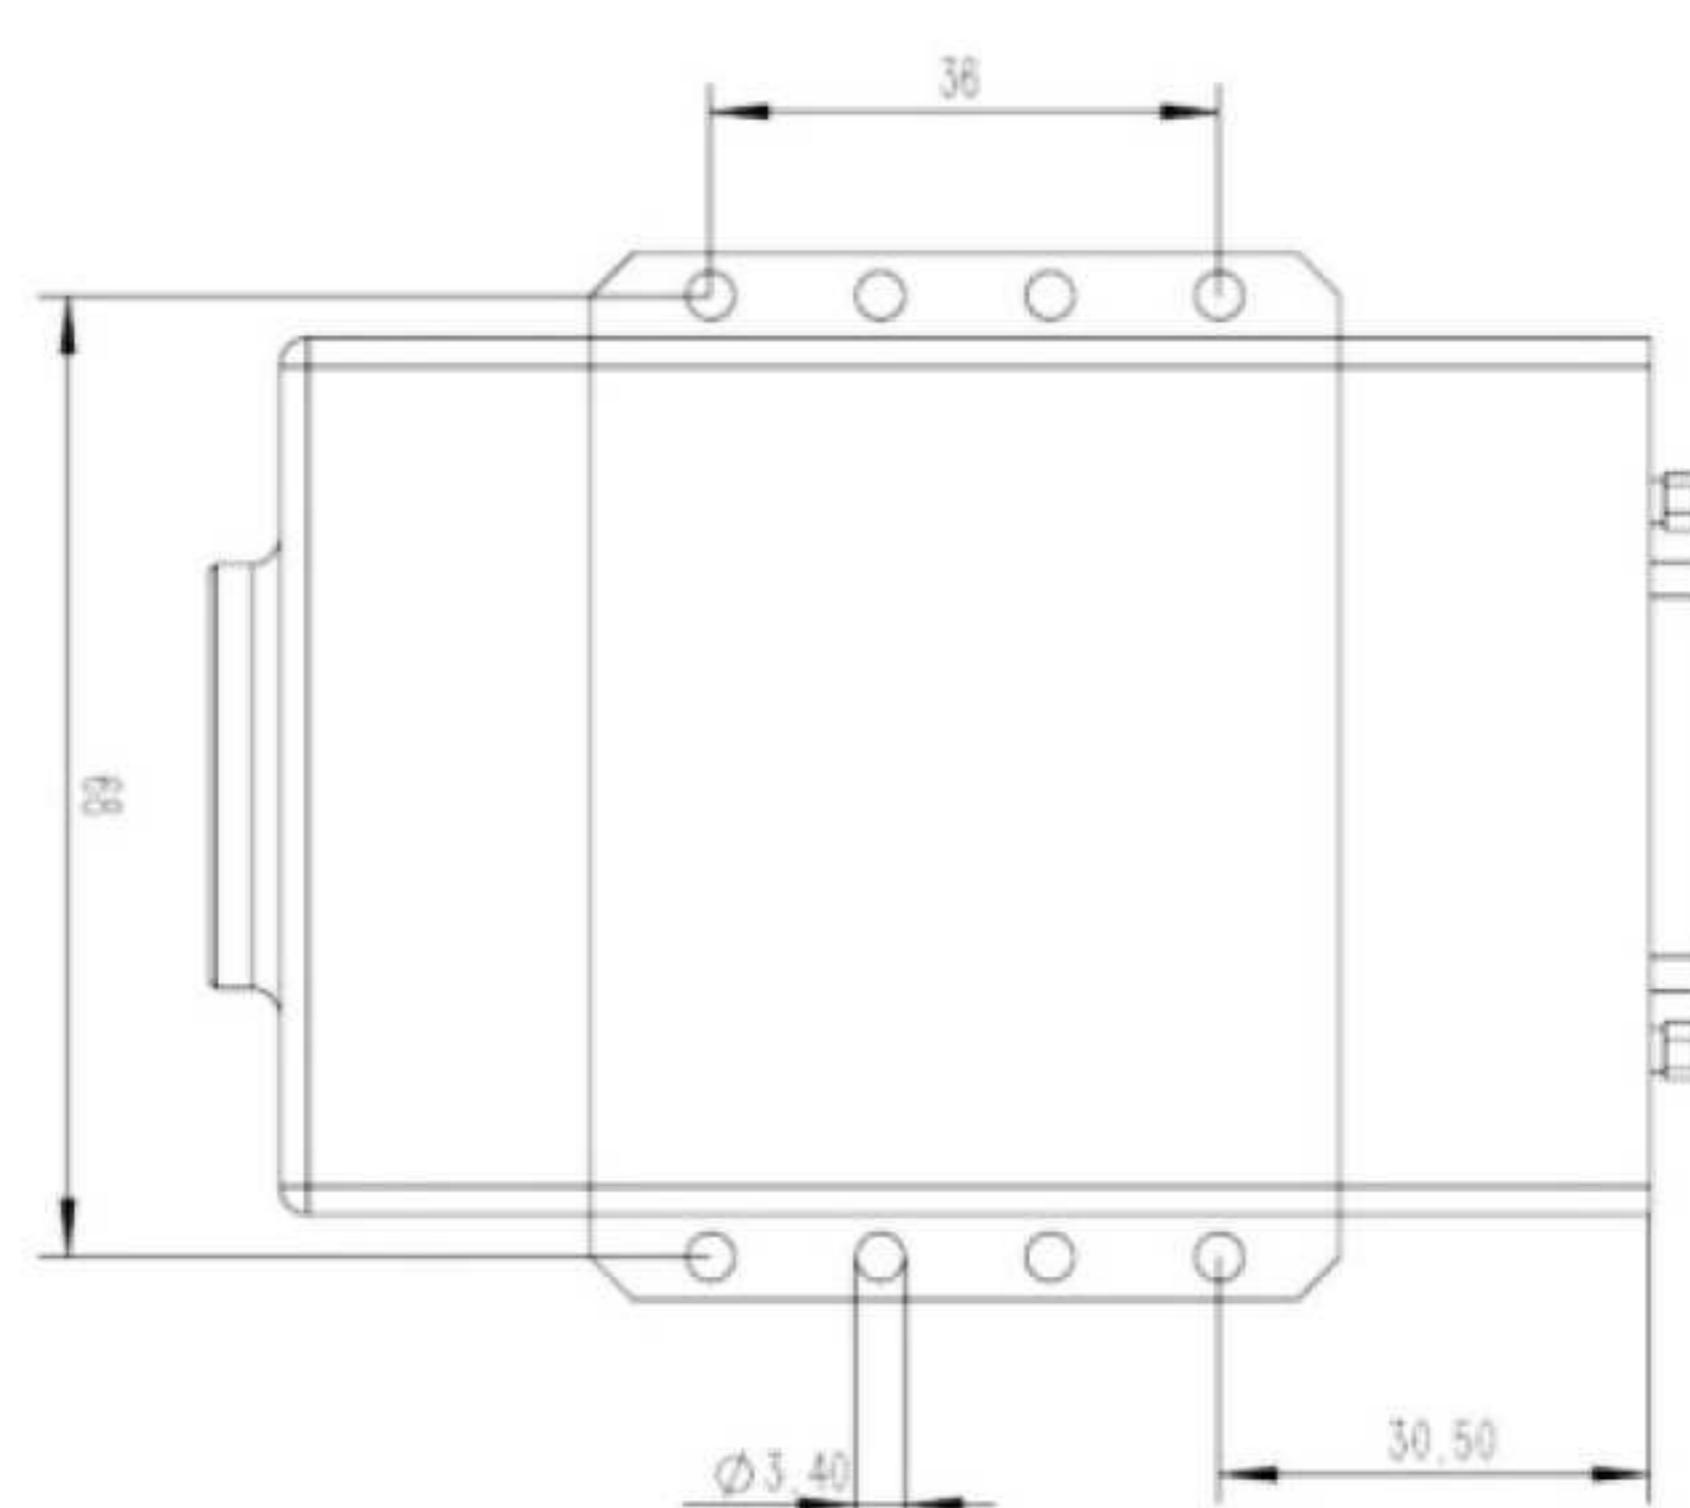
External dimensions (tolerance of ±0.1mm)
